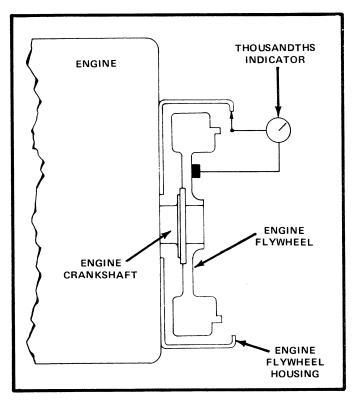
Checking the Bore of the Engine Flywheel Housing.
